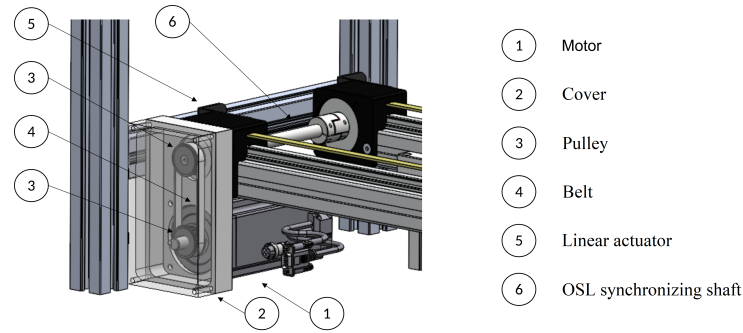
Components of the transmission system between the motor shaft and the linear actuator shaft and between the two shafts of the linear actuators.
